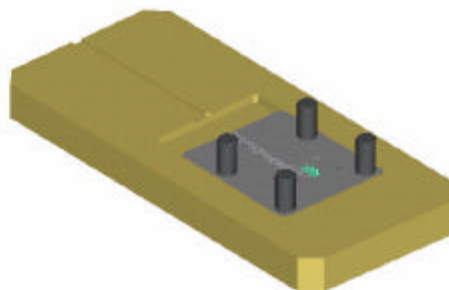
Assembled View of Tooling Configured to Solder PIN Diode Leads
